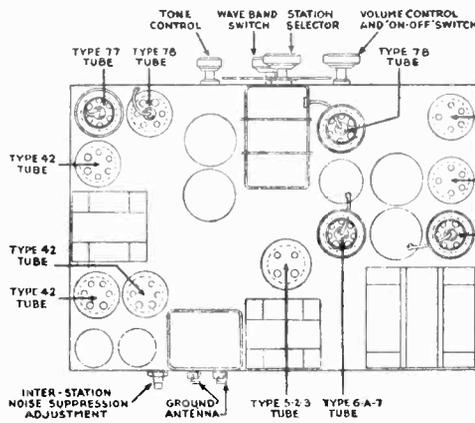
Top View of Chassis, showing Tube Locations, and Major Parts
